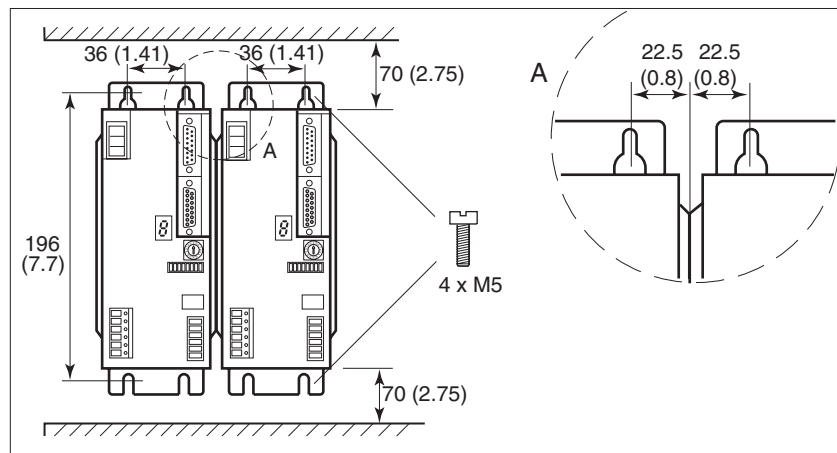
Installation clearances, dimensions in mm (in.)
